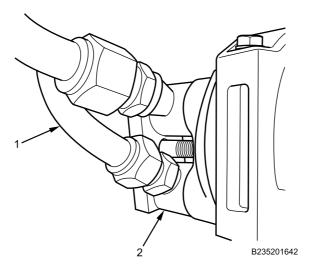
HVAC Compressor Discharge Hose at Compressor.
